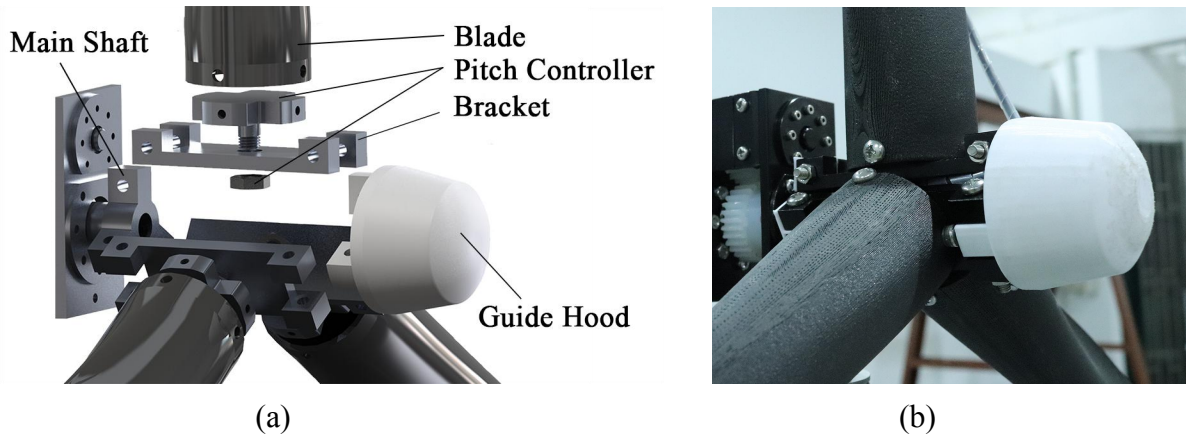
The hub (a) An exploded view. (b) The physical structure.
